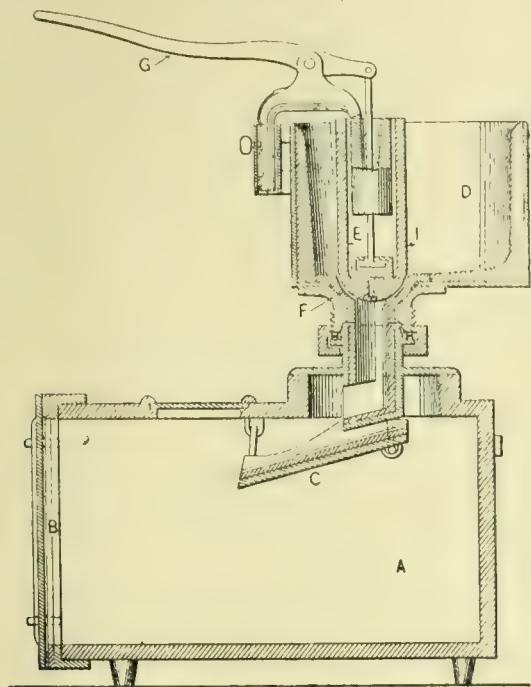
APPARATUS FOR CASTING IN A Mould IN A VACUUM.
